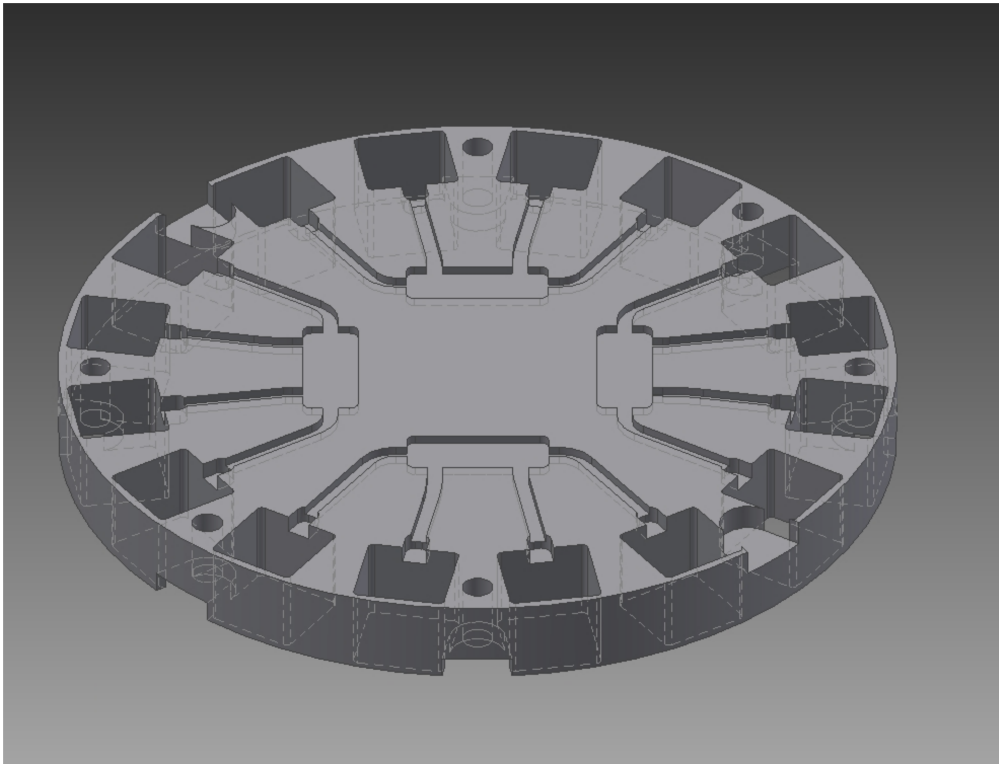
The PCB cover corresponding to the PCB in figure 20 b).
